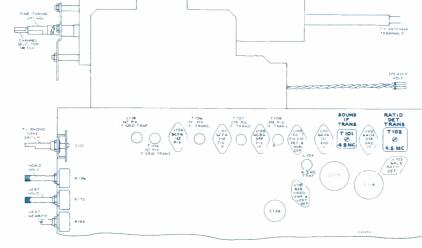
Bottom Chassis Adjustments (KRK29 Tuner Shown)
